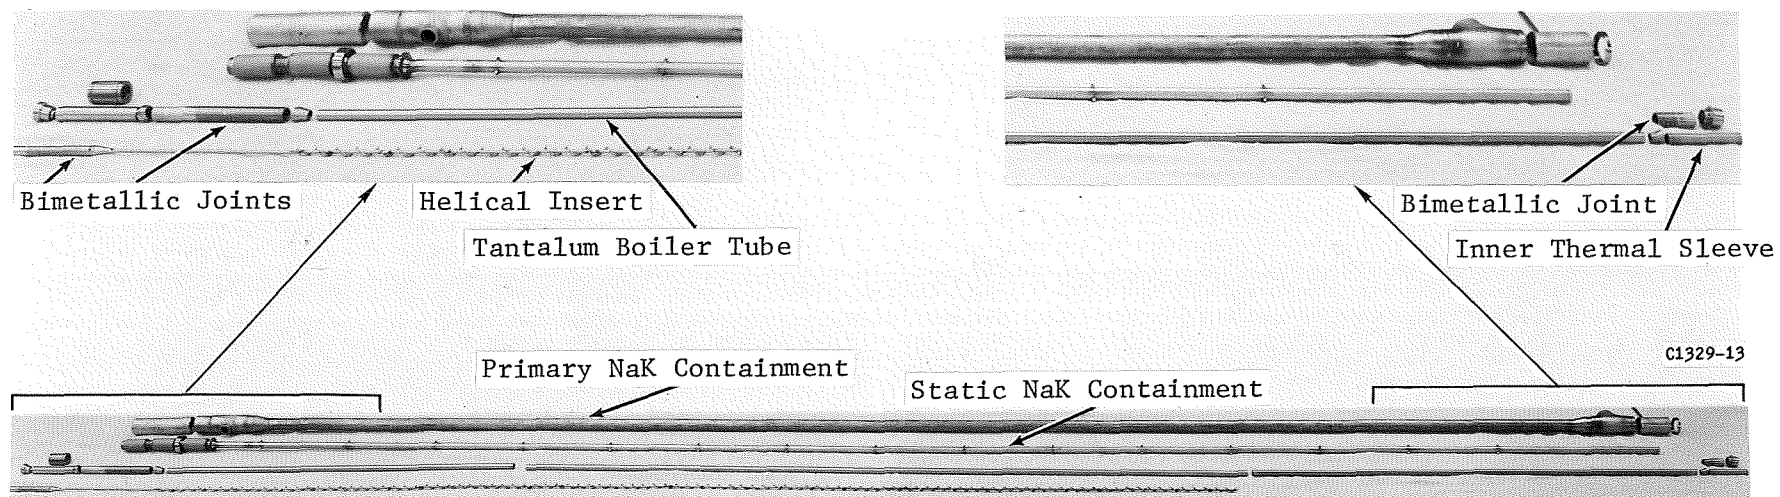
SNAP-8 Single Tube Test Boiler. C68011583
